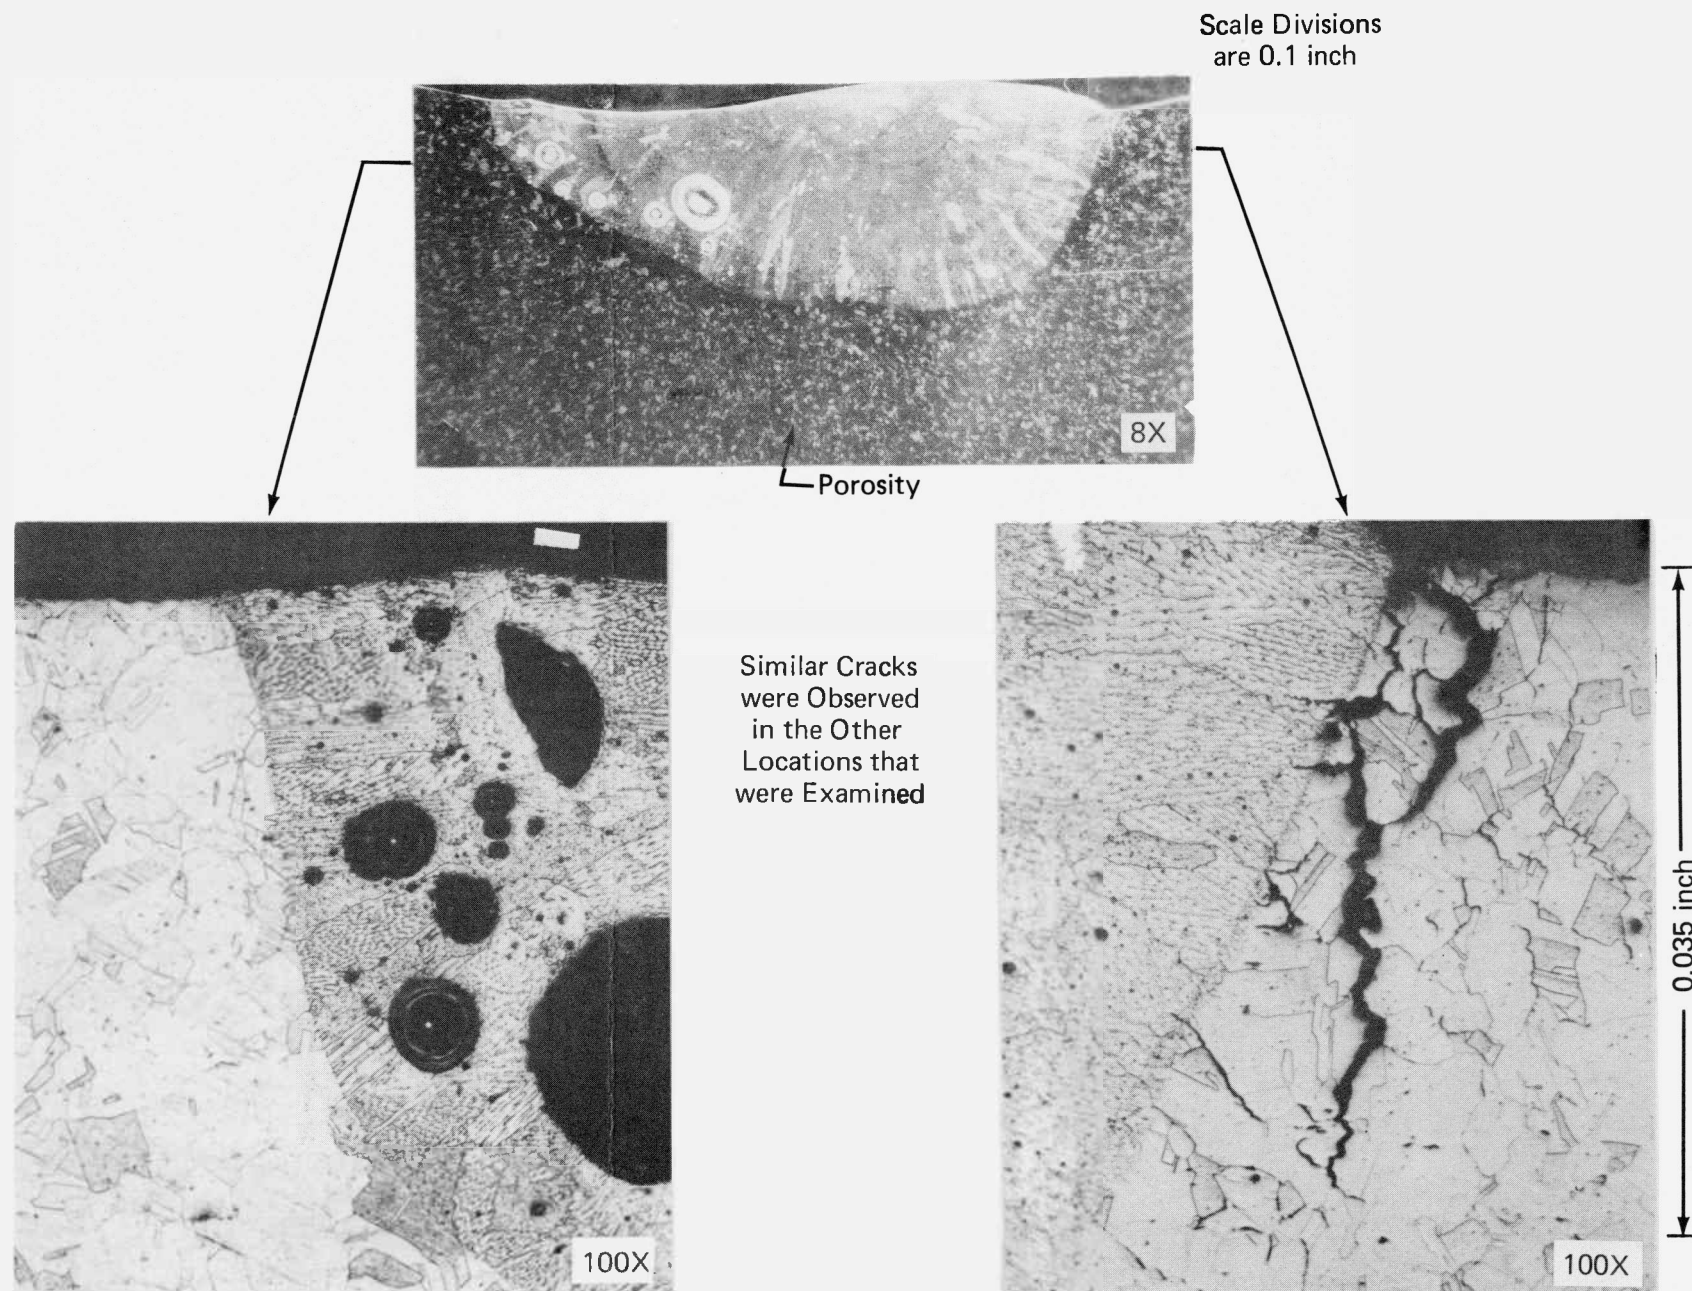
Typical Toe Crack and Porosity at C-Tank Conditions, Piece A-1
